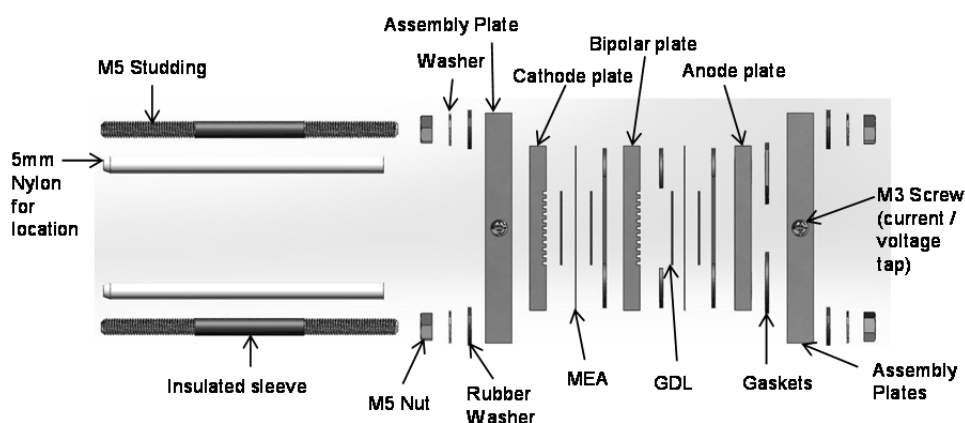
Side view of a 2 cell PEMFC prototype stack design in exploded view.
